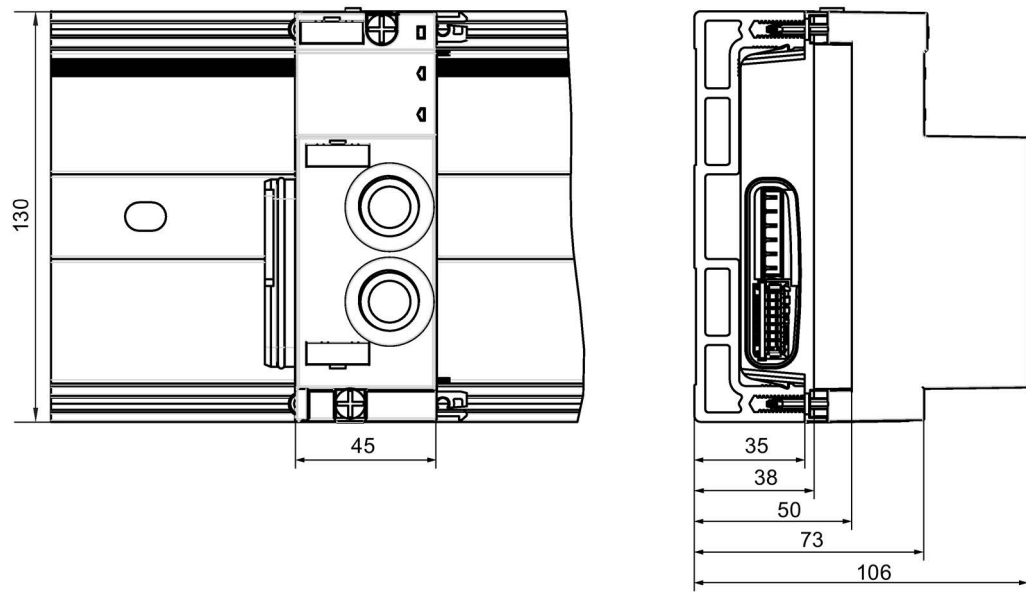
Dimensional drawing of the power module with CM PM Direct connection module
